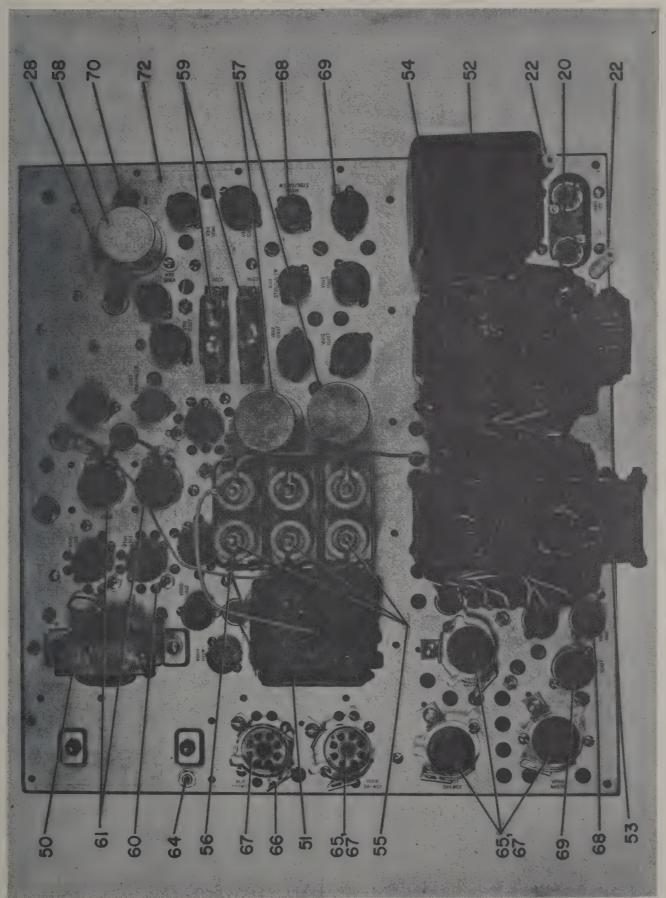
Vertical Chassis Assembly - Right Side (Sheet 2 of 3)
